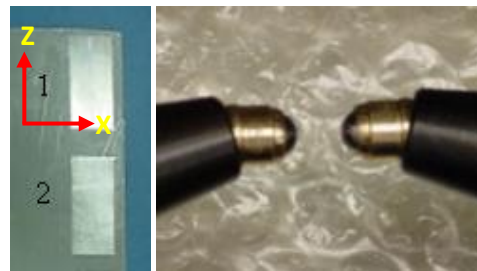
Ti₆Al₄V sheet specimen and double-sided LPB tooling (provided by GEMTC)
